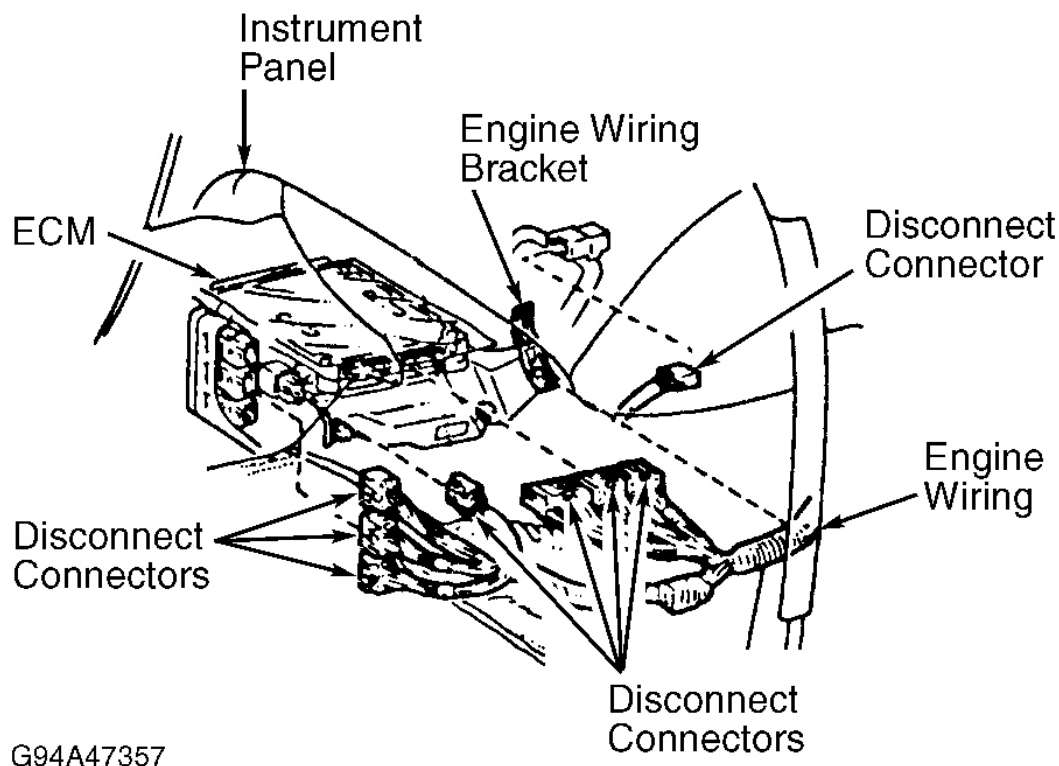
Locating ECM & Engine Wiring Connectors (Celica)
